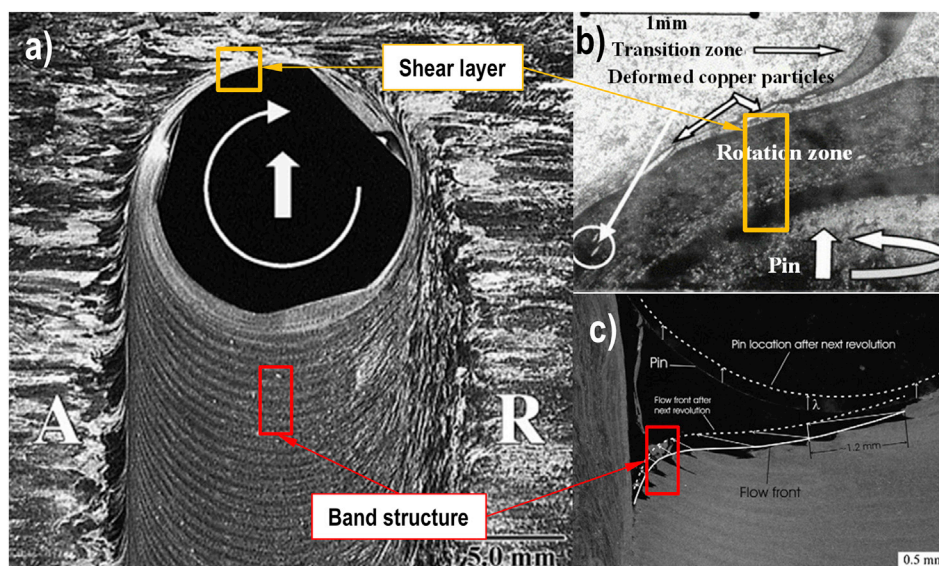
Typical shear layer and band structure in typical FSW welding a) Planar view [23]; b) shear layer in front of pin [25]; c) band structure behind of pin [26].
